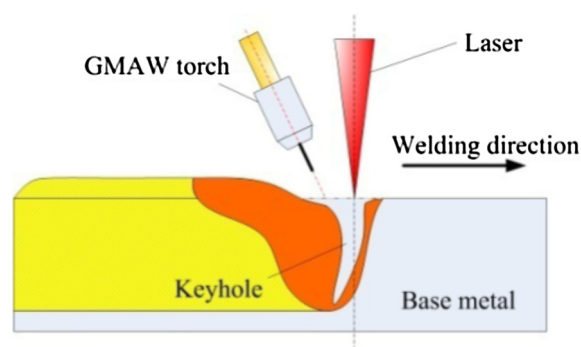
Schematic of laser+GMAW hybrid welding.
